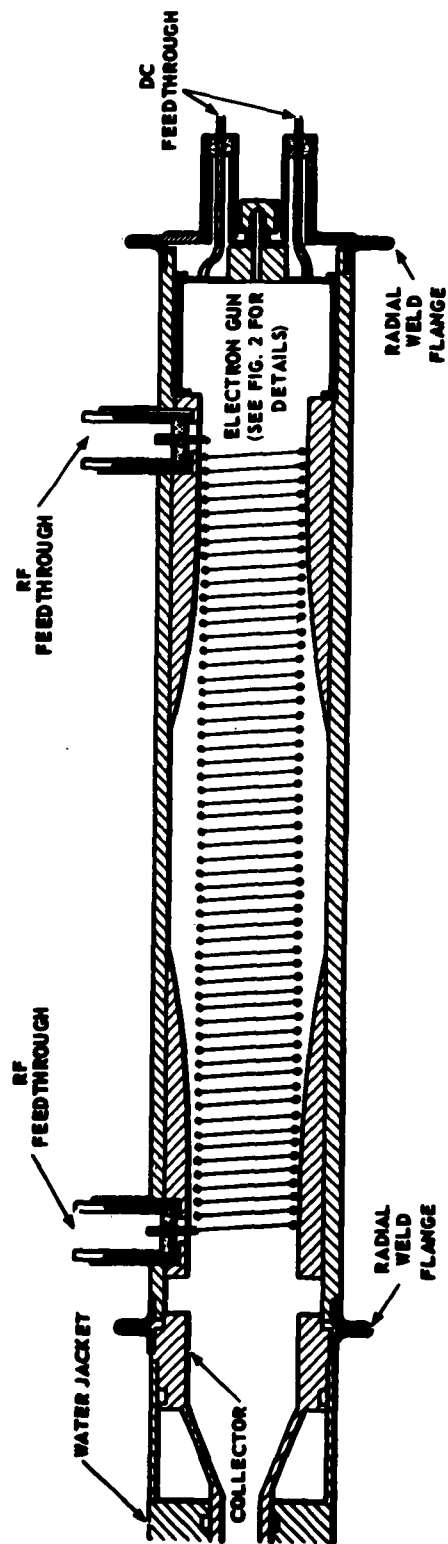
ASSEMBLY DRAWING OF TUBE--DETAILS OMITTED.
